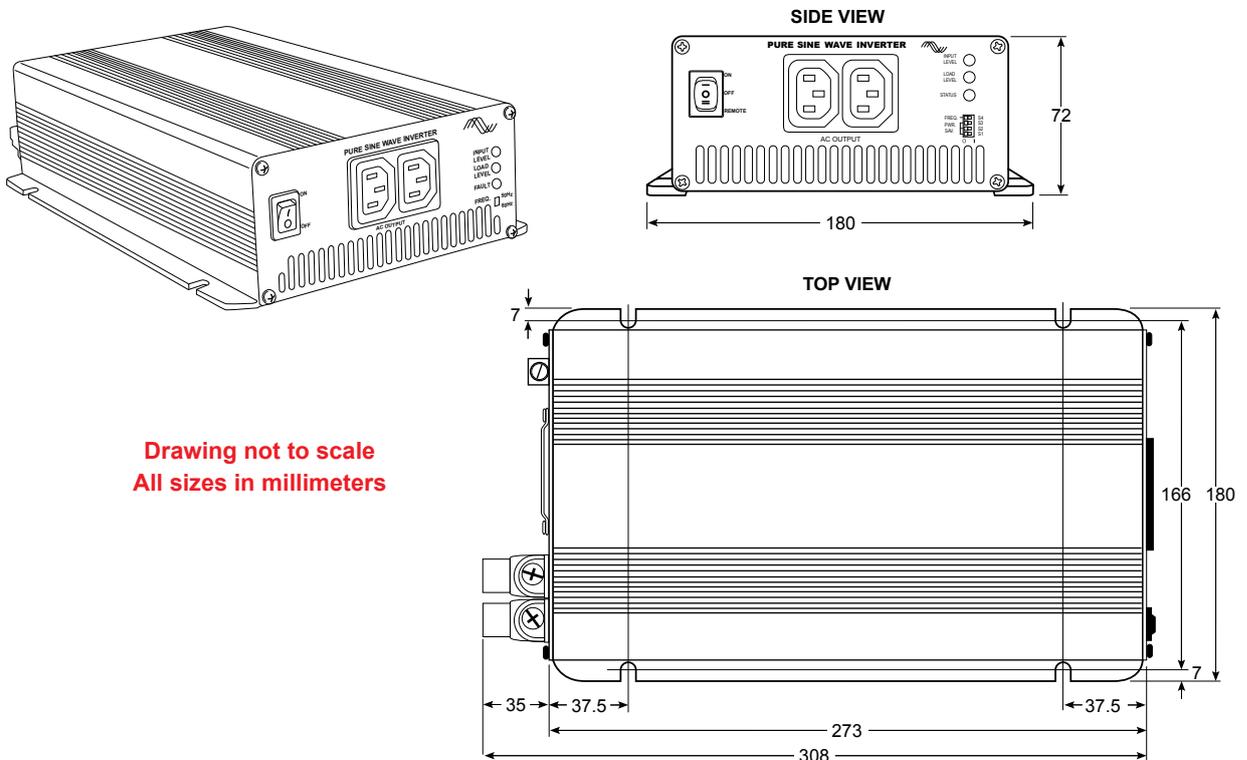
24 V DC Power Supply Unit Mounting Bracket Outline and Dimensions
